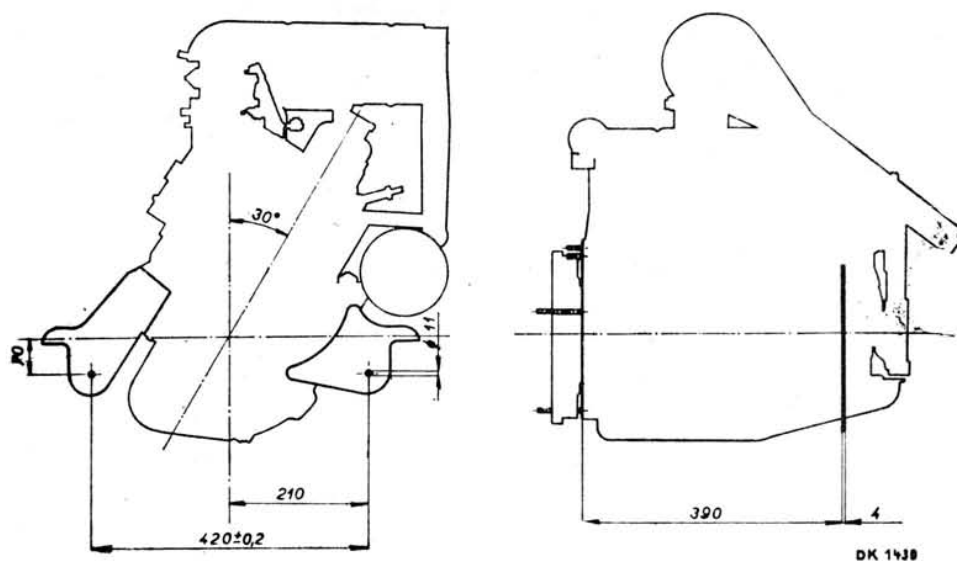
/4 - Mounting Dimensions of Engine and Flywheel
